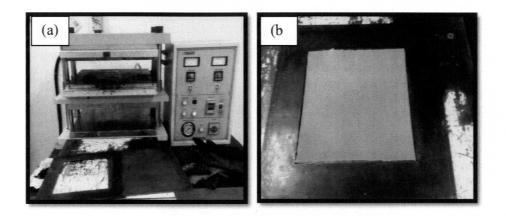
(a) Hot moulding machines (b) Mold of rubber foam
